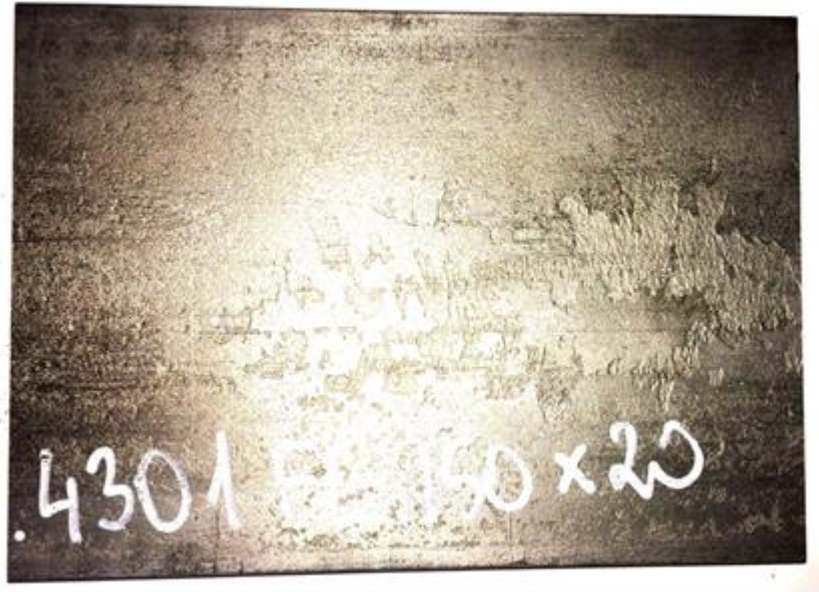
Workpiece of steel with dimensions 150x130x20mm
